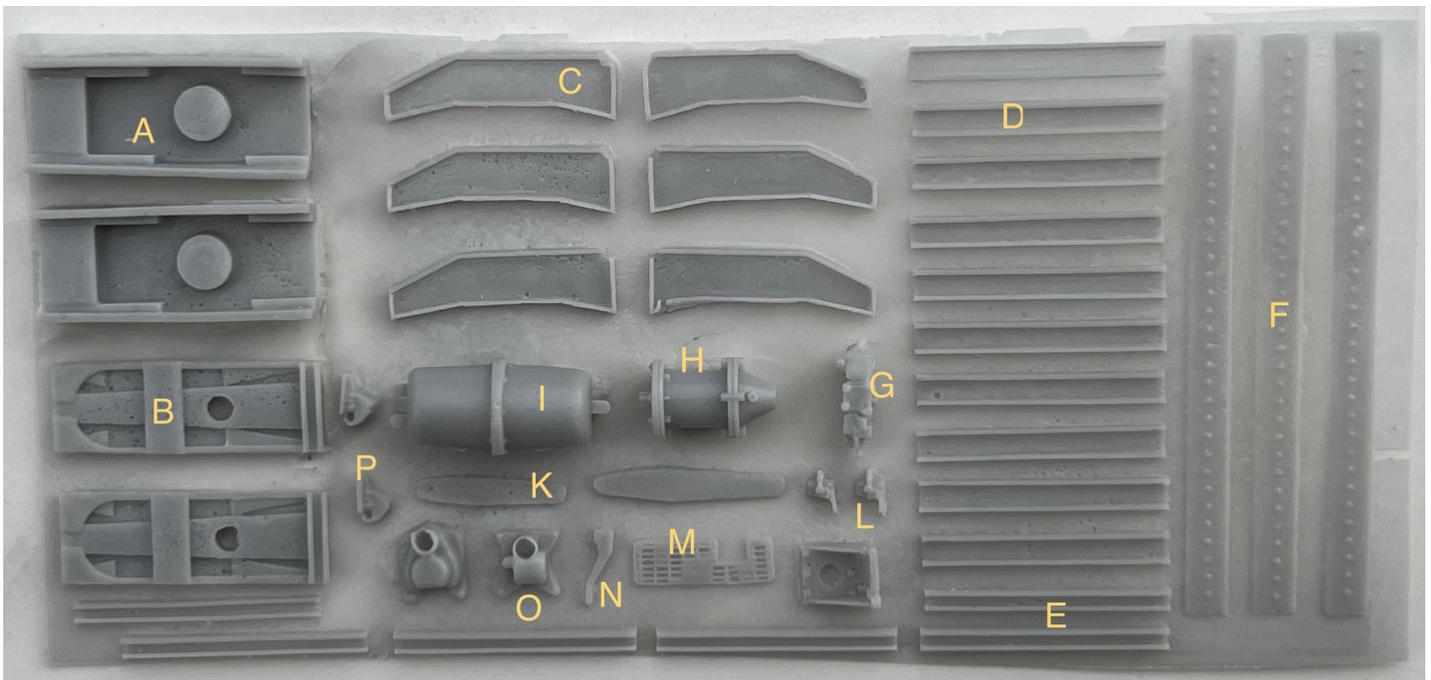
Cast resin details sheet, parts identification. A = draft gear coupler boxes, B = coupler box covers, C = cross bearers, D= large crosssties. E = small crosssties. F = crossbearer rivet plates.
